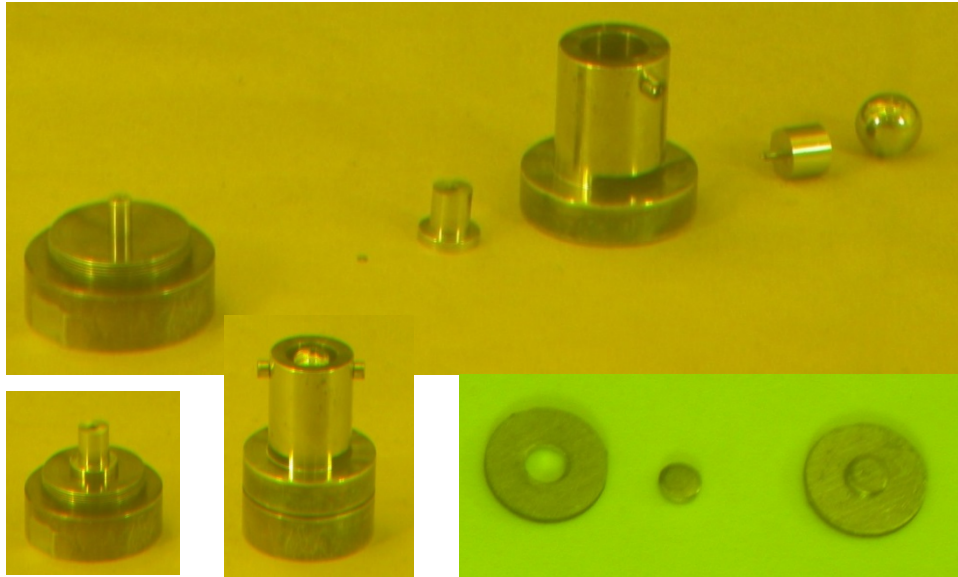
Images of Shear Punch Test fixture for 3 mm x 0.25 mm TEM samples using a 1 mm punch.
